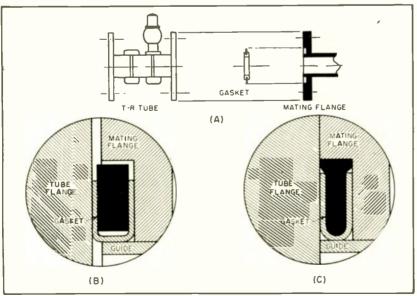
View of complete duplex, above, and detail of gasket assembly for t-r tube and mating flange, below. Basic components (A) are assembled (B) then compressed to form tight seal (C)
